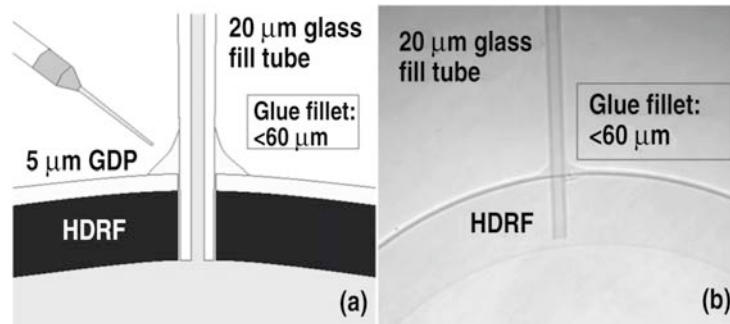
Specifications for the HDRF assembly (a) and imaging by XRADIA (b).
